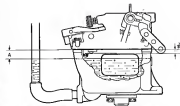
Method of testing fuel valve and seat. Distance "A" should be exactly 11/16 in. for this model. Fuel height must be 7/32 in.
